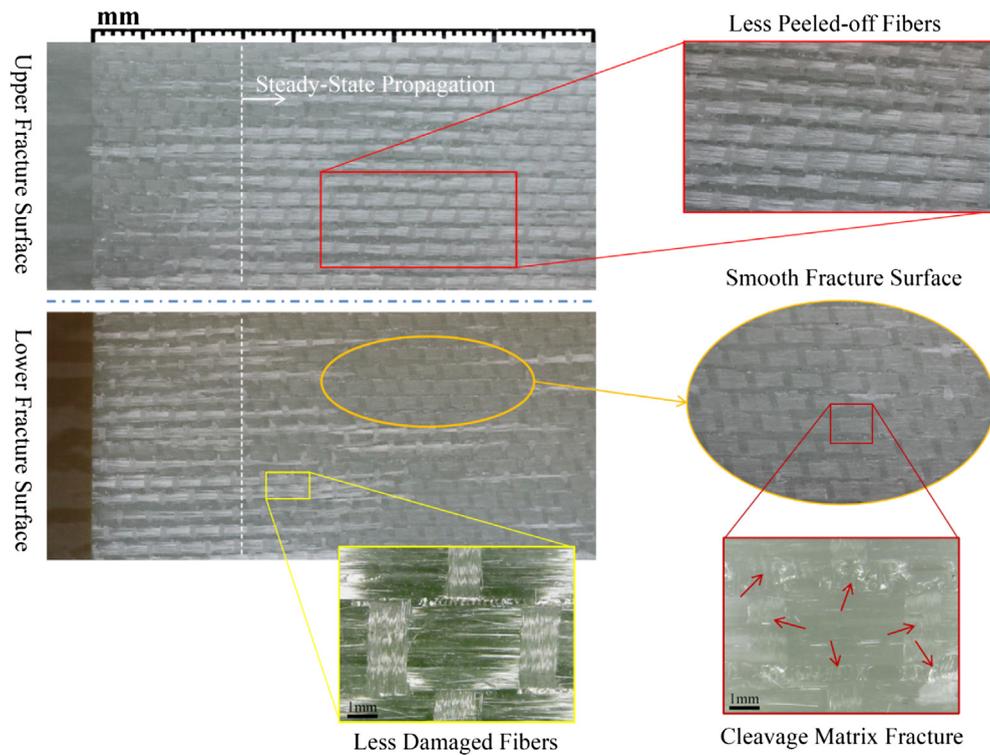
Fracture surface inspection of the glass/epoxy composite specimen at 200 mm/sec loading rate.
